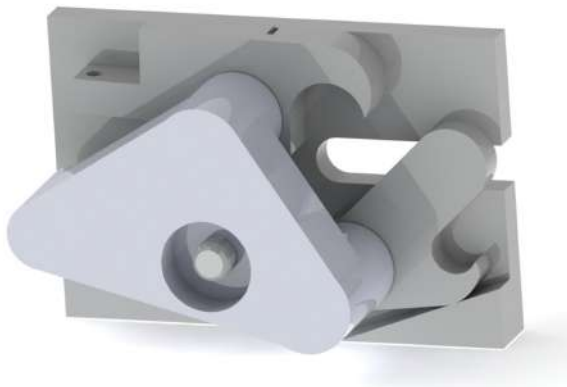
Isometric view of the Cable Actuated Continuum Disk Mag-lock design in its open configuration.
